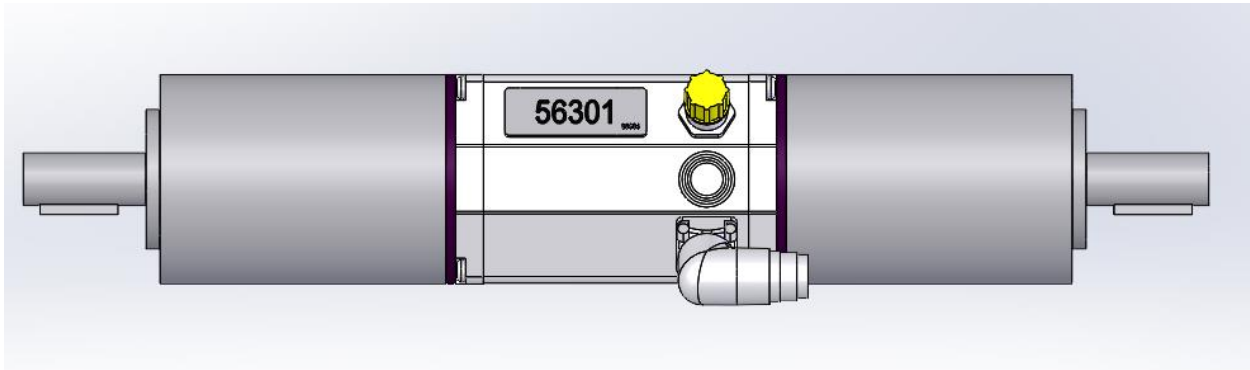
SSR Motor Assembly P/N 56301 w/ Holding Software
